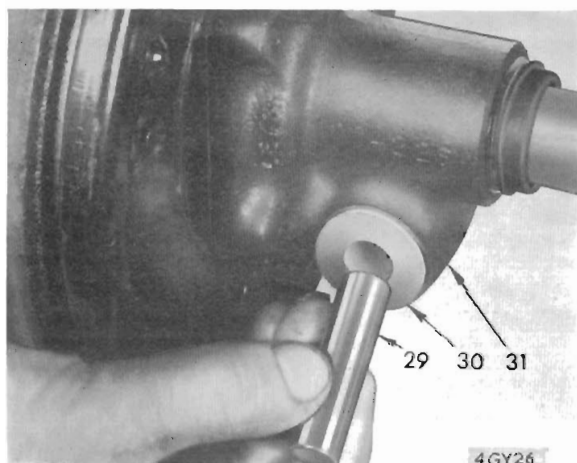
Removing steel bush from nylon bushes in trunion housing
